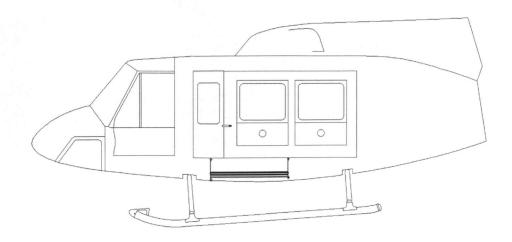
RAPPEL STEP INSTALLATION
